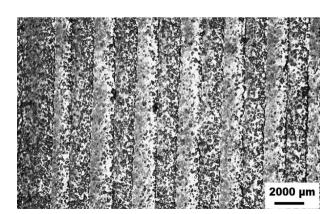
The surface of the weld cladding coating made from powder of medium hardness 10.12.6 with a laser step size of 1.5 mm used – no cracks
